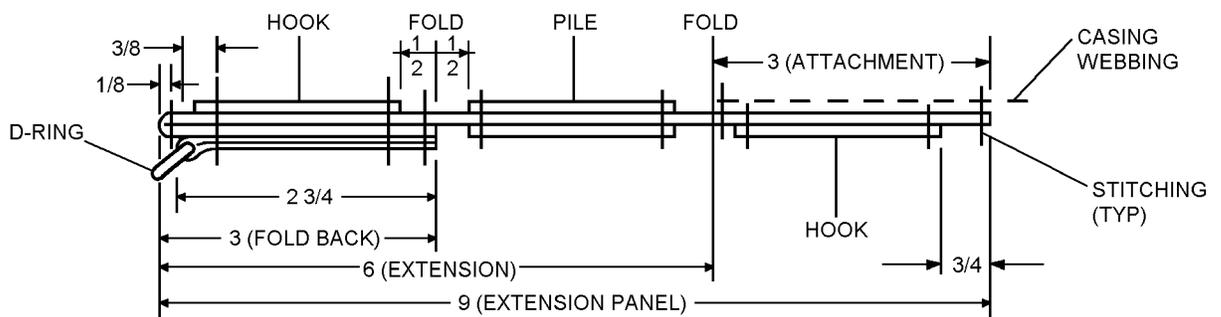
Fabrication of Casing Webbing Belt Extension Panel
